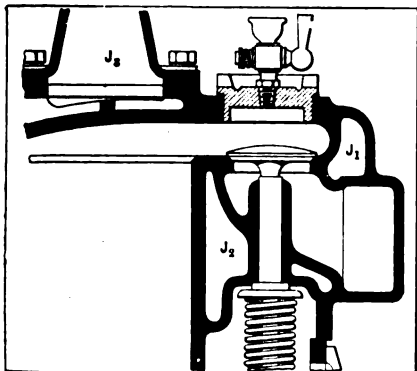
Section through a valve pocket showing how the entire seat is properly cooled
